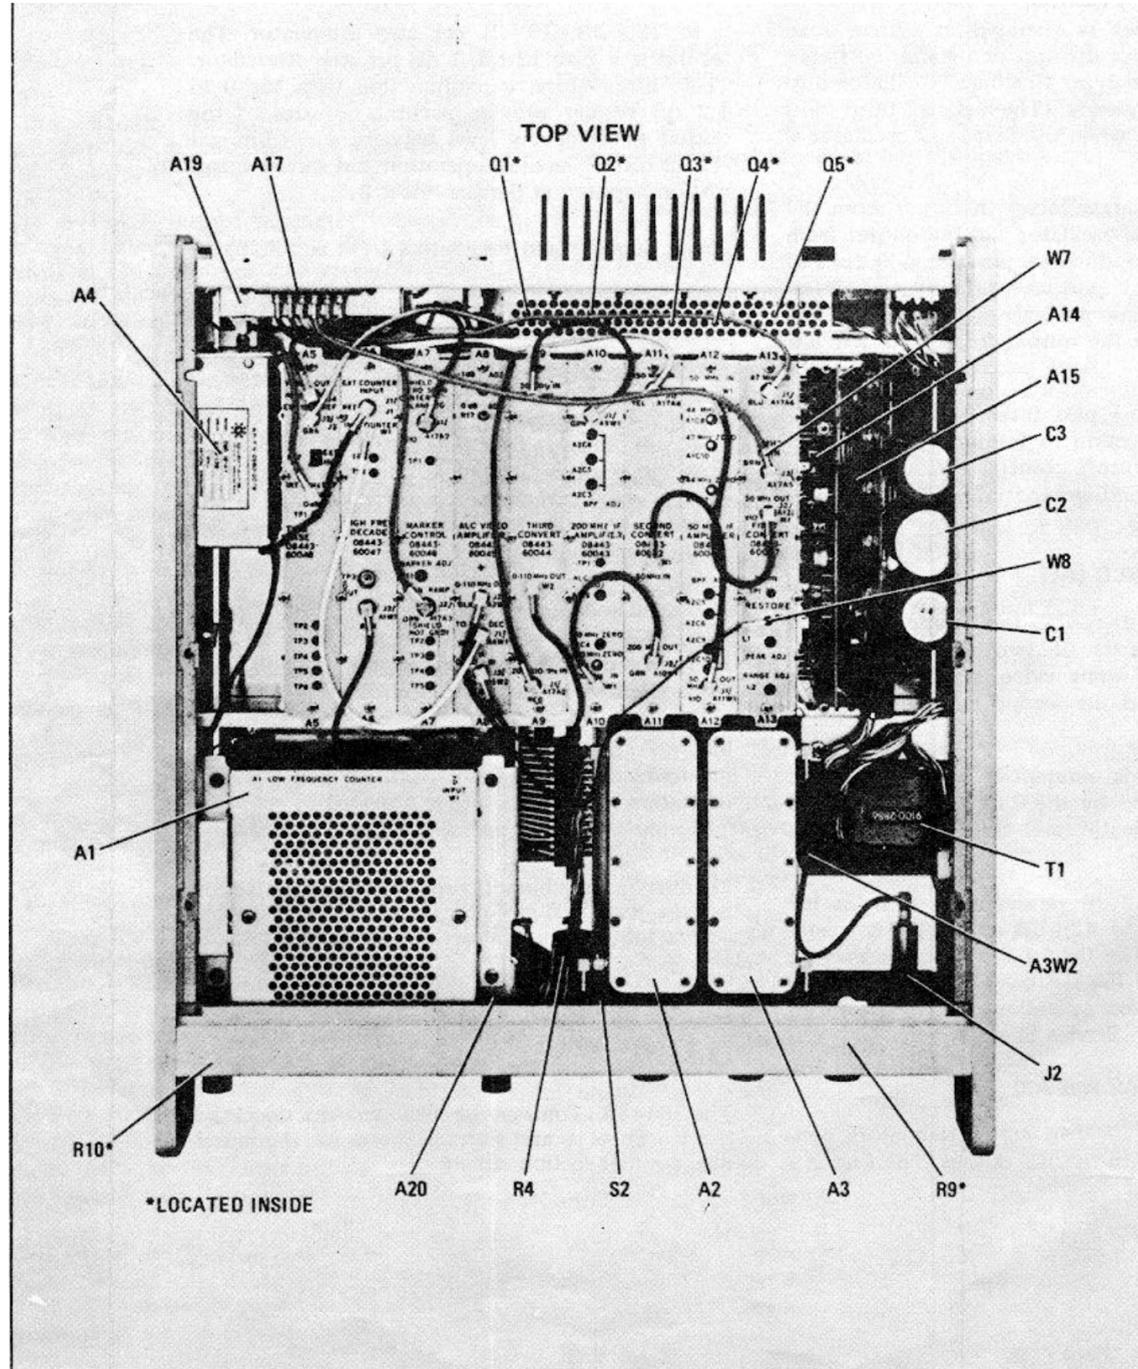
Chassis Mounted Parts and Assembly Locations
